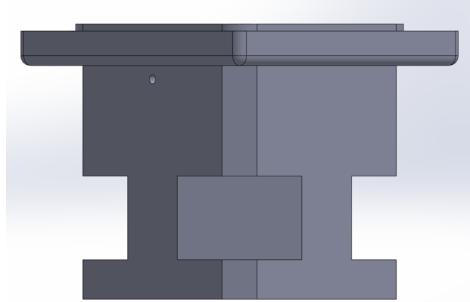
Solidwork's Isometric Bottom view of J.K Coldfinger.
